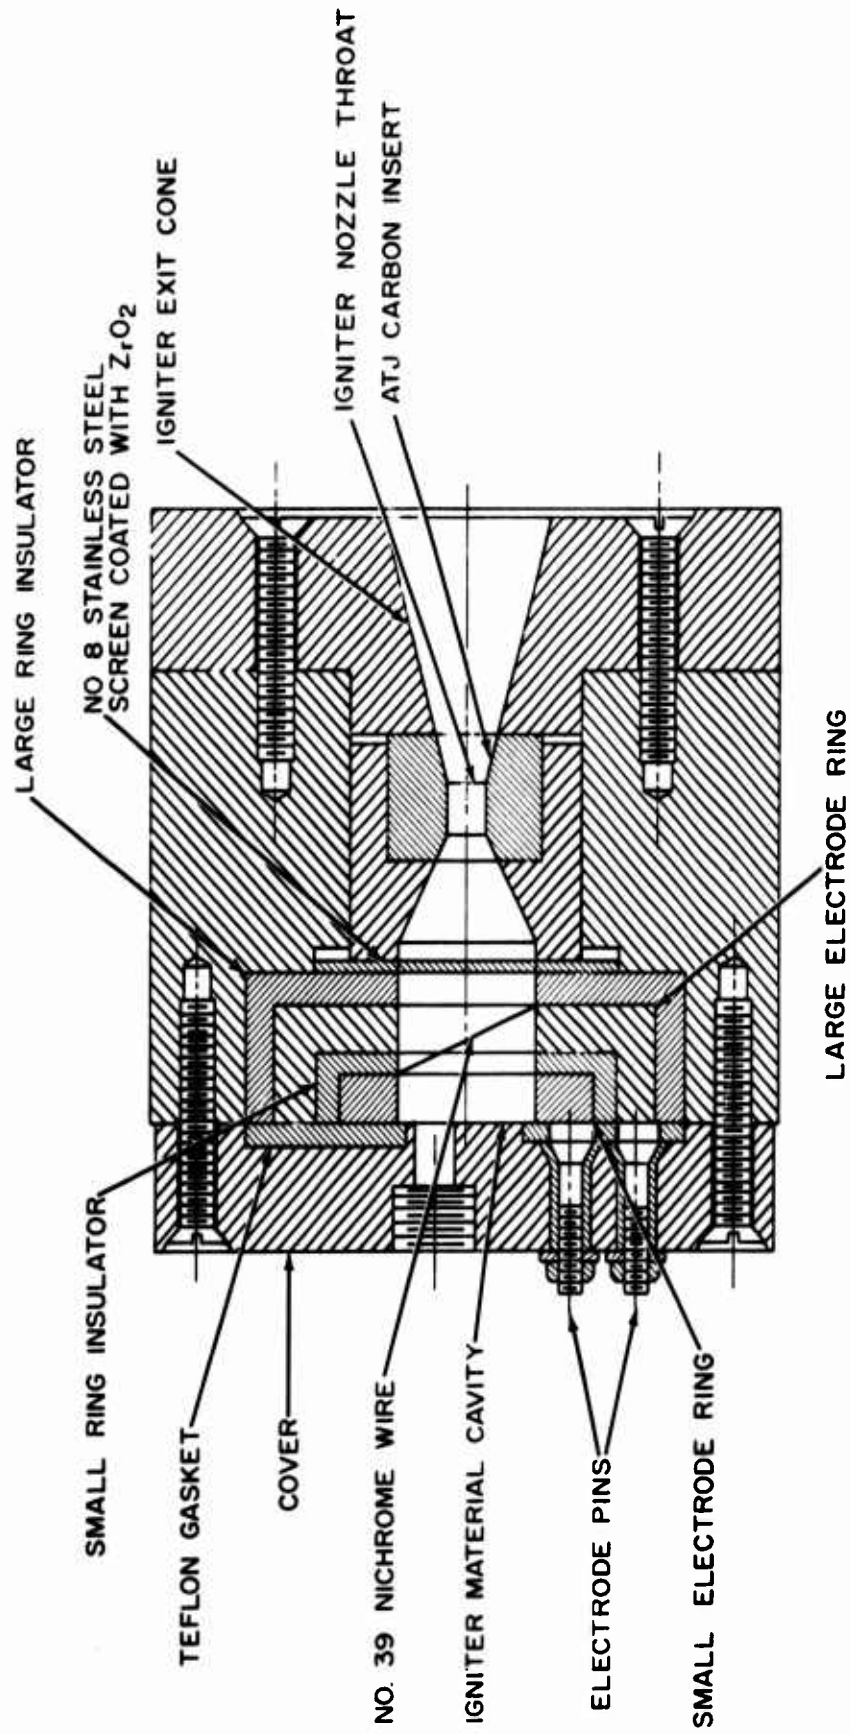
A SCHEMATIC DRAWING OF THE HI-LO" IGNITER
